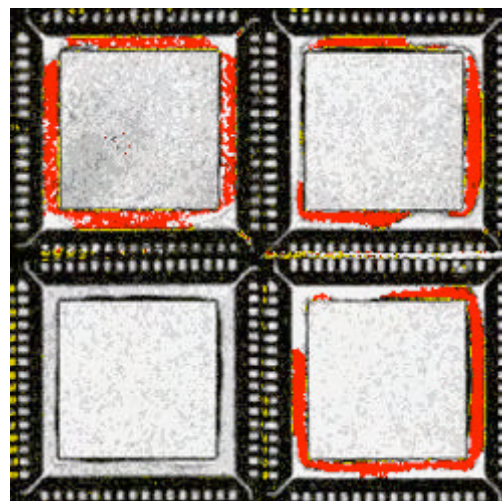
This acoustic image shows that the overmolding is delaminated (red) from the heat sink, which is slightly larger than the die.
